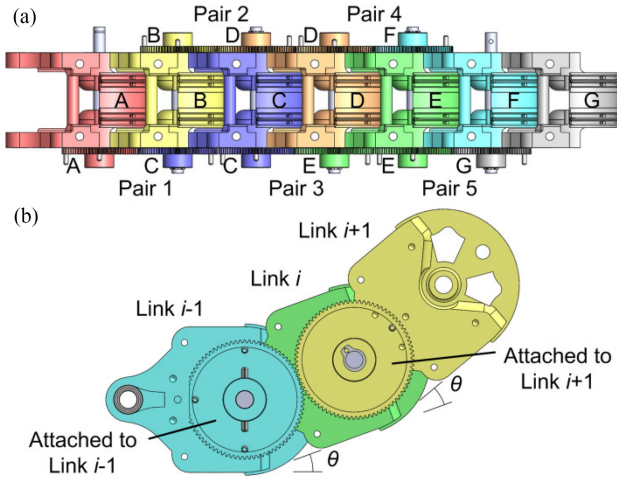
R3RT gearing. (a) Single-segment gear arrangement for Links A–G; each gear’s color and label indicate the link to which the gear is rigidly attached. (b) Angle constraint from gear pair.
